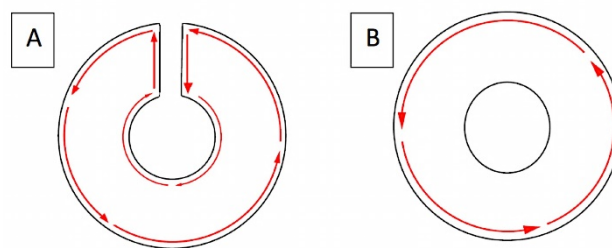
Cross-section of a fieldshaper with (A) and without (B) radial cut [11].
